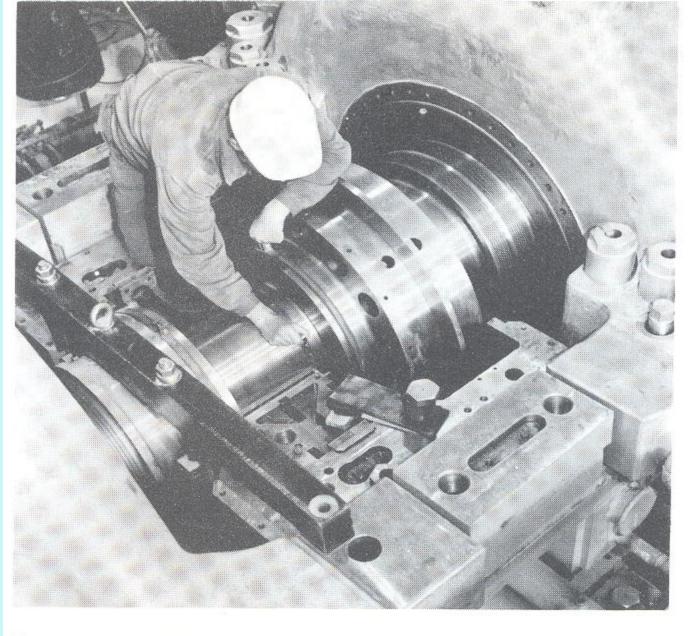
Measuring Lateral Clearance of Lower Bearing Shell
